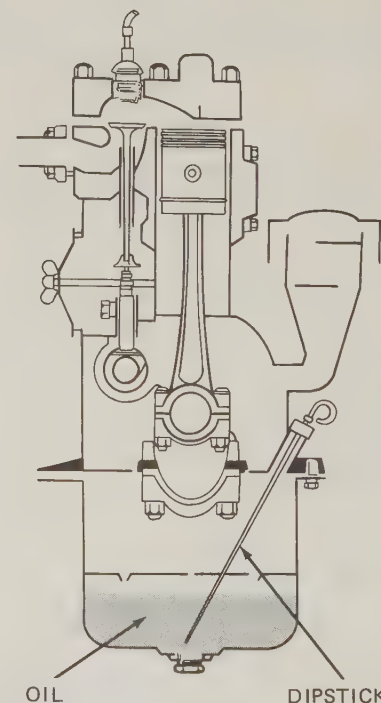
Sectional view of a four-cycle engine, showing level of oil in oil pan and location of dipstick.
